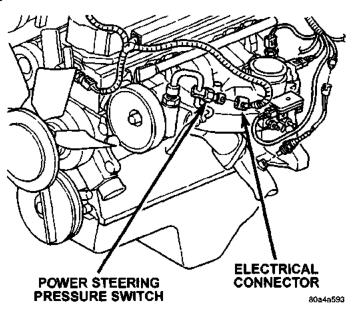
Power Steering Pump Pressure Switch—2.5L Engine
